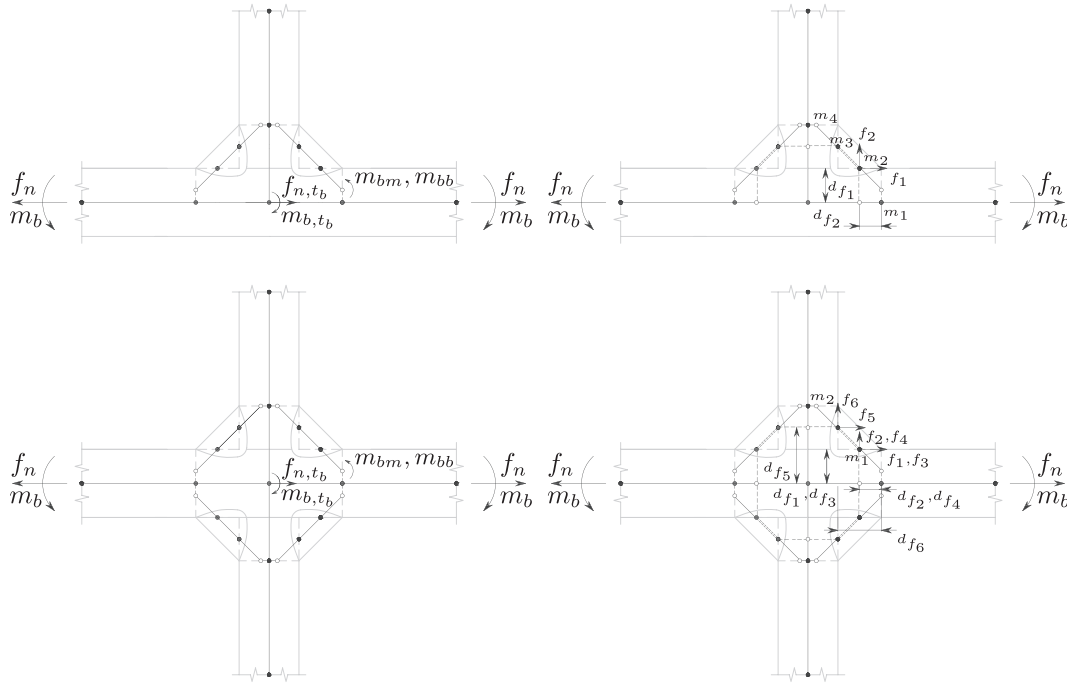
Single weld element beam model (left) and double weld element beam model (right)
